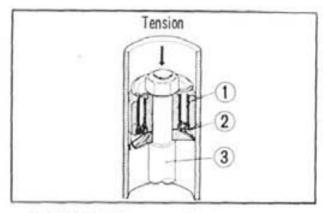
(1) Piston (2) Valve (3) Rod
